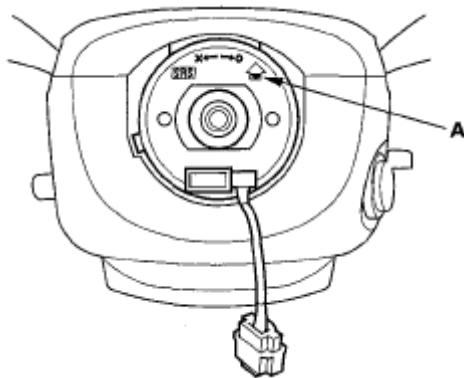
Identifying Arrow Mark On Cable Reel Label Points Straight Up
